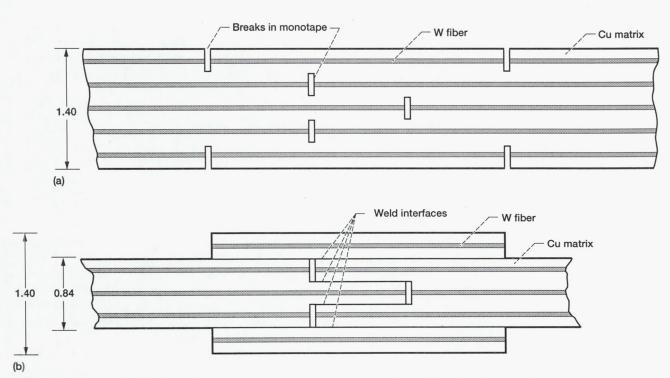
Longitudinal thickness sections of simulated and welded tongue-in-groove butt joints in three-ply W-Cu sheet with single-ply doublers. Typical tongue length is 6 mm and doubler length is 20 mm. (Not to scale.) (a) Simulated joint in five-ply composite material in as-consolidated condition without weld interfaces. (b) Actual welded joint with consolidated tongue, groove, and doubler components joined at Cu-Cu weld interfaces. (Dimensions are in mm.)
